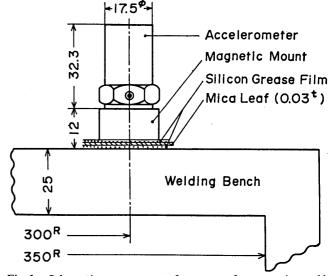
Schematic arrangement of apparatus for measuring welding vibration.
